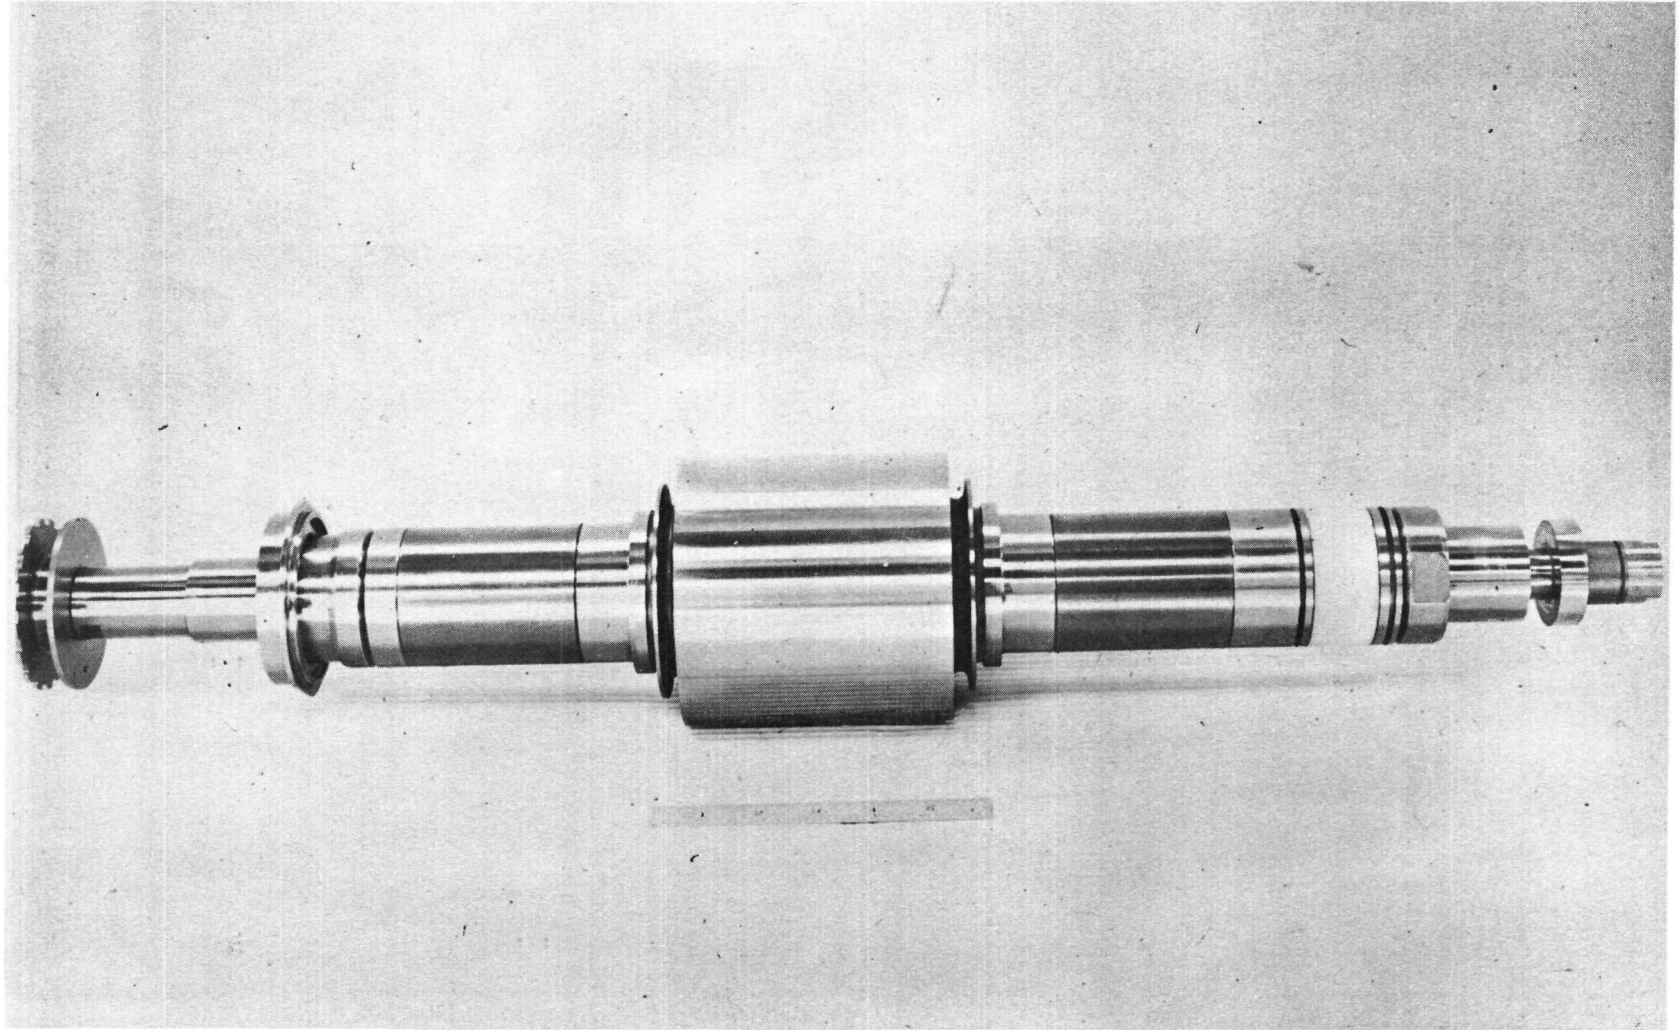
Liquid Metal Bearing Test Rig Rotor.
